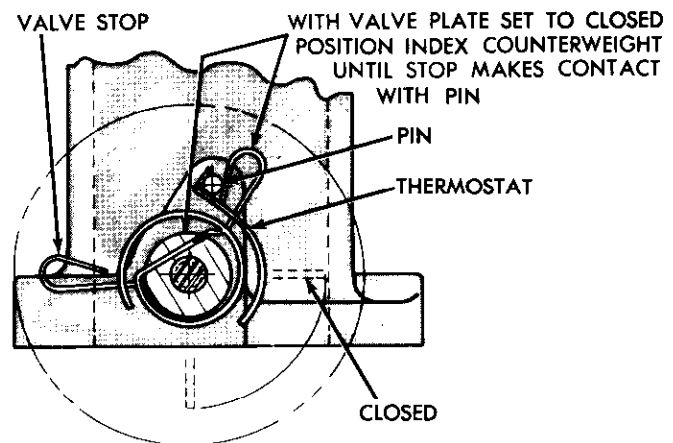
Proper Manifold Heat Control Valve Installation (383, 440 Cubic Inch Engines)
